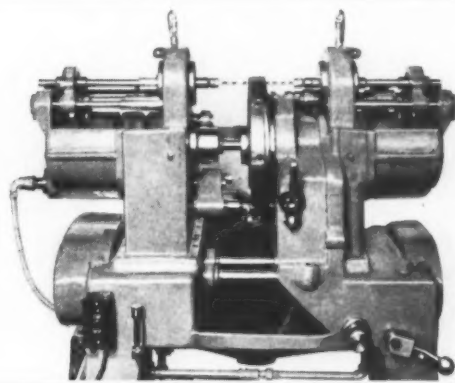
Buhr Two-way Drilling Machine for High-production Operations on Small Parts
